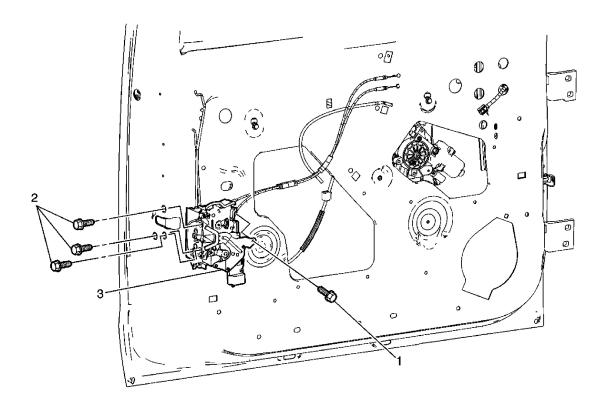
Lock Replacement - Front Door Courtesy of GENERAL MOTORS CORP.
